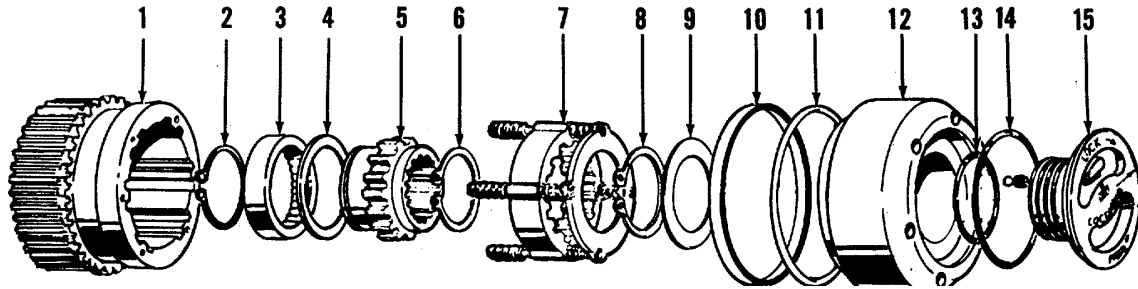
Spring-Loaded Manual Type Locking Hub with Socket Head Mounting Screws
